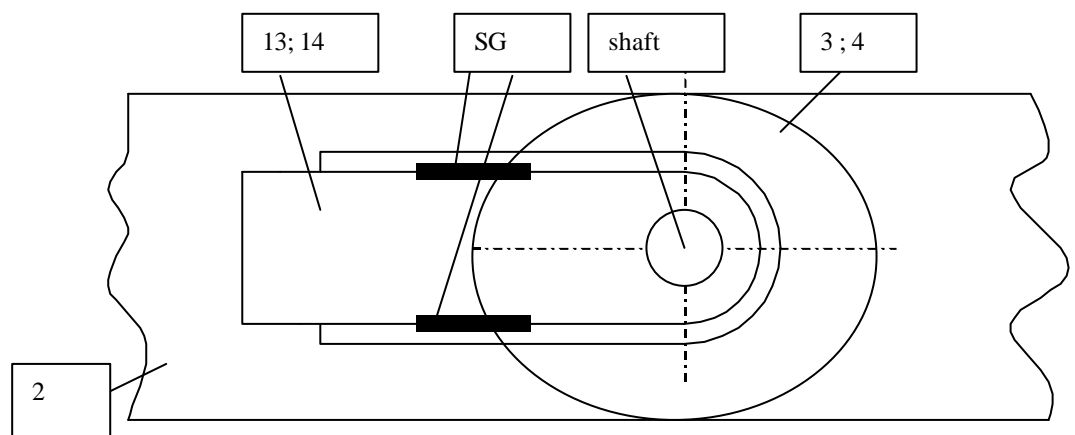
A wheel mounted on a cantilever beam by a shaft and bearings
